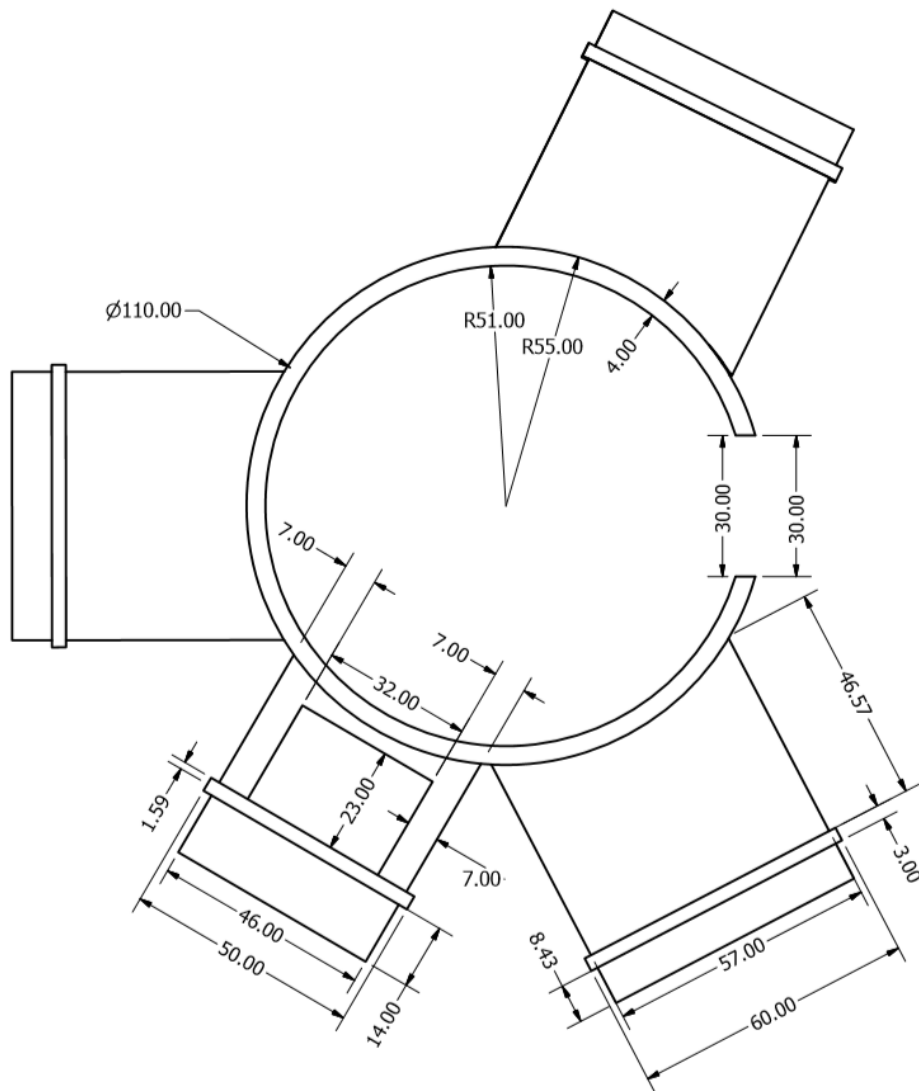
Technical drawing of the lighting rig housing with dimensions in mm. The depth and inner diameter of the housing is dependent on the size of the subject chamber being used and tolerances should be small enough to prevent light from entering the chamber when LEDs are off (~1mm).
